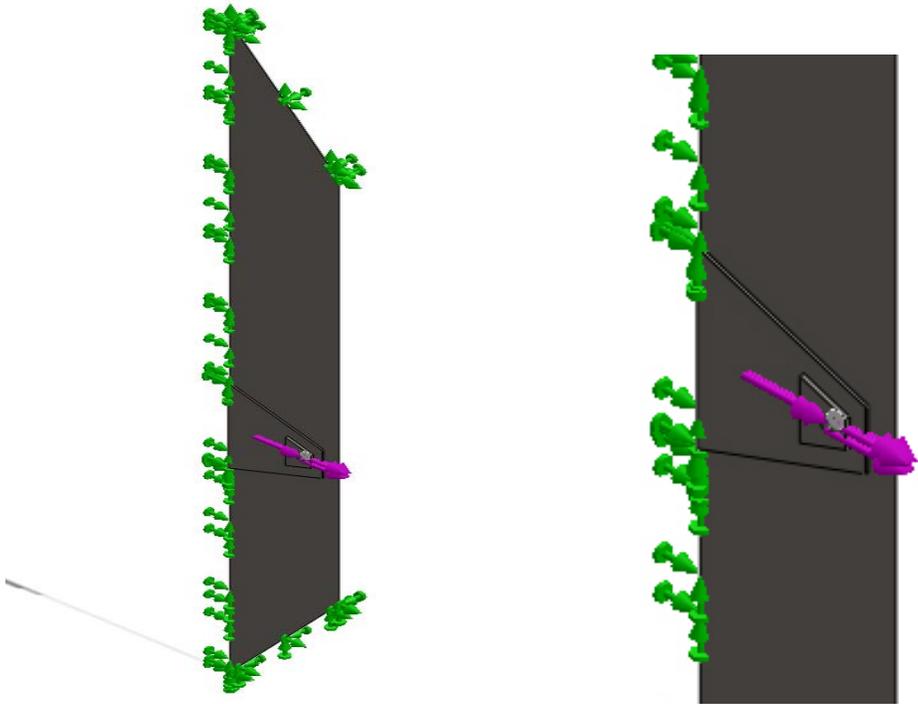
Full and enlarged view for the buoyancy plate with fixed and load bearing locations shown.
